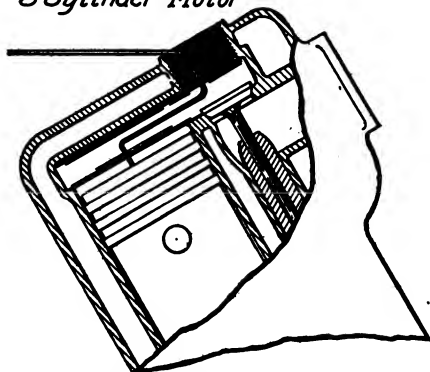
Tool Made from Wire for Indicating Dead Center in V-Type Motors
